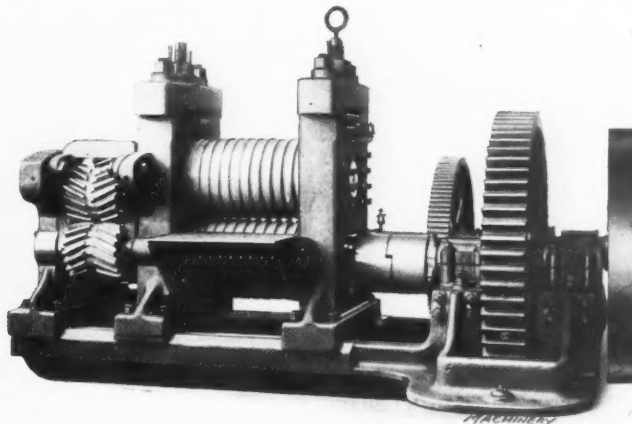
Single-end Rifle Barrel Rolling Mill built by Williams, White & Co.
